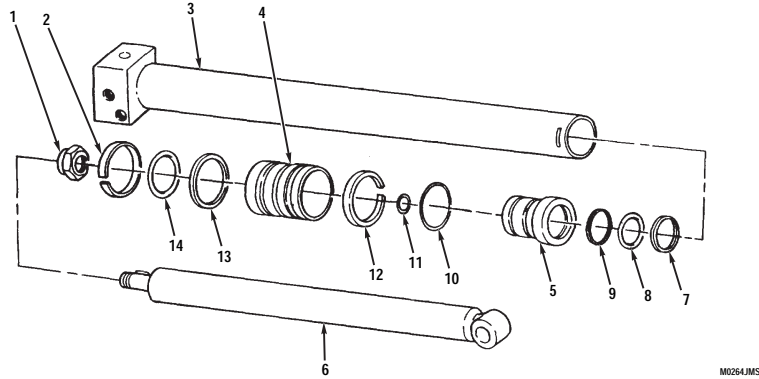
Hydraulic Positioning Cylinder (with Side Lift Kit) Assembly.
